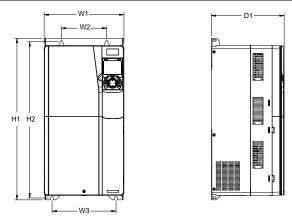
Wall mounting diagram for 380V 45-75kW models
